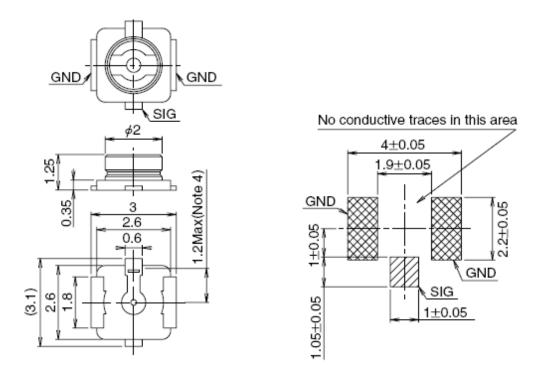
Dimensions of the UF.L-R-SMT Connector (Unit: mm)
